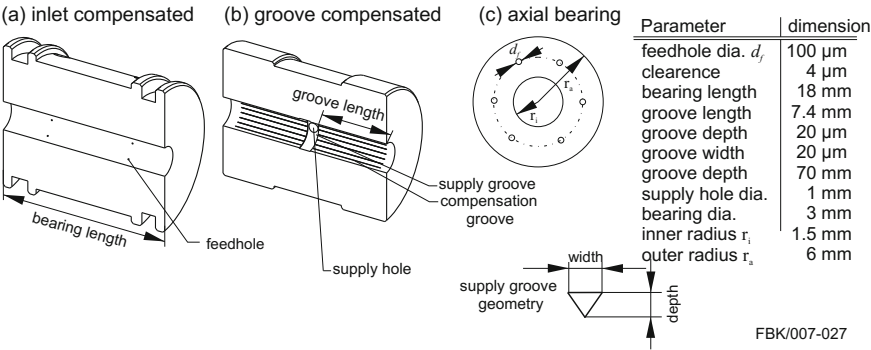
Aerostatic bearing design a inlet compensated journal bearing, b groove compensated journal bearing, c thrust bearing (feedholetype inherent)
